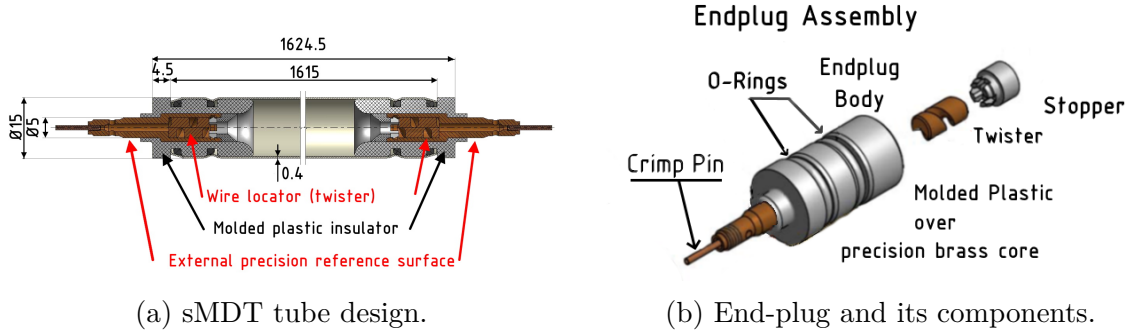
Tube design with an exploded view of the end-plug components [68]. All length measurements are in mm.
